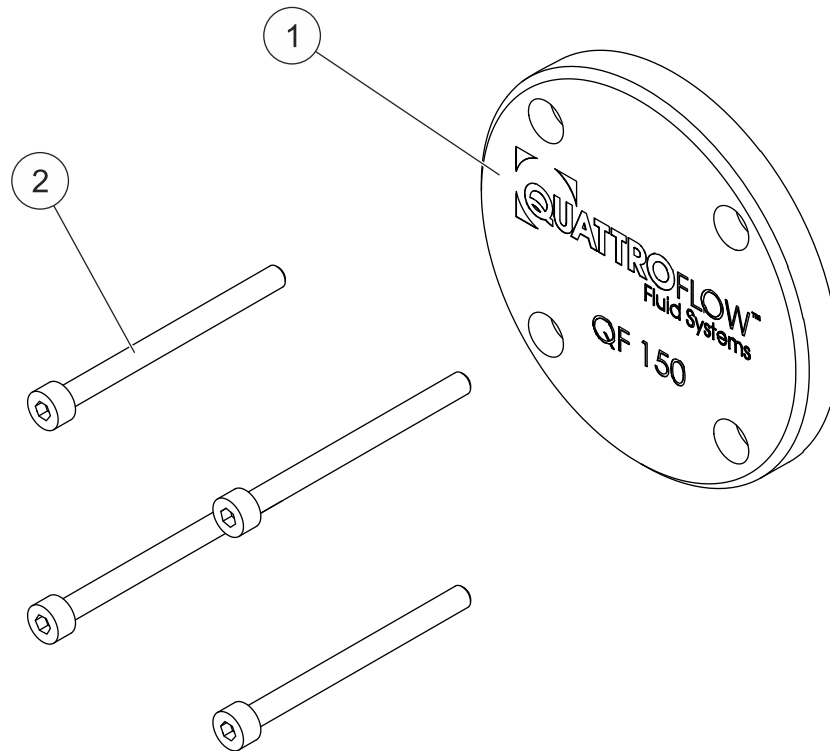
Sub-assembly pressure plate PQ15DISKIT
